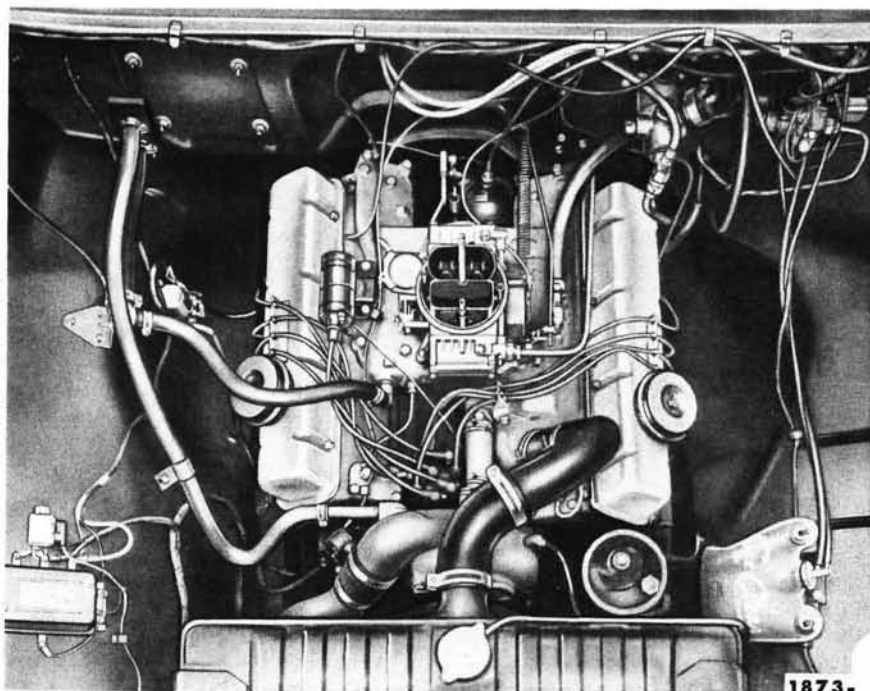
Typical SD V-8 Engine Installation—T-Series Truck
